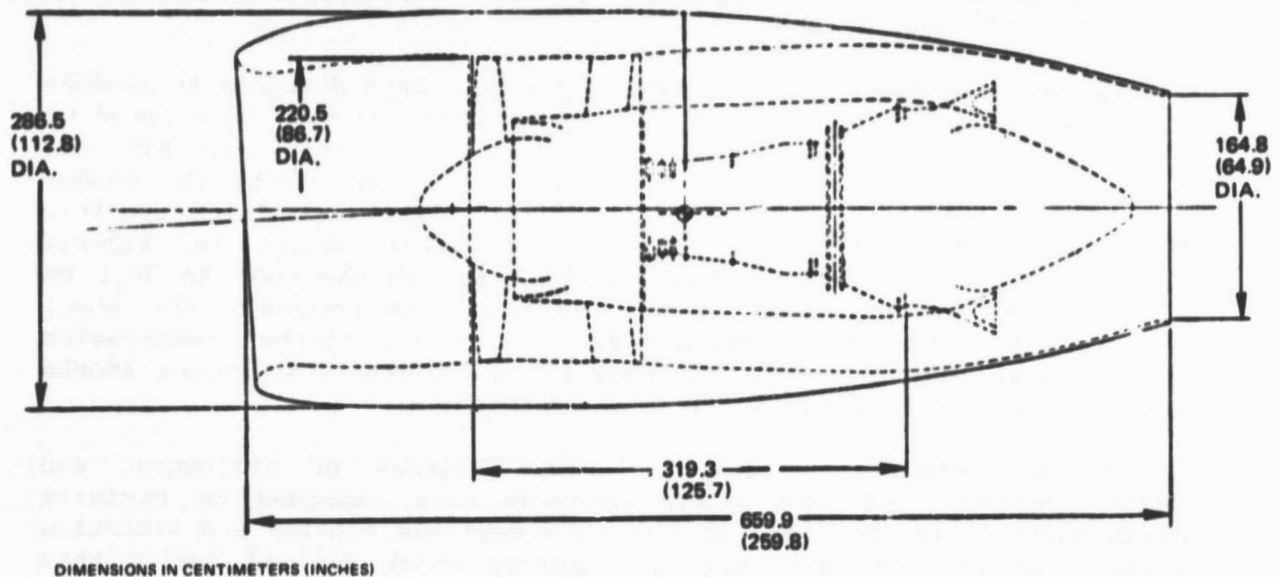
Energy Efficient Engine Installation Drawing With Overall Dimensions
